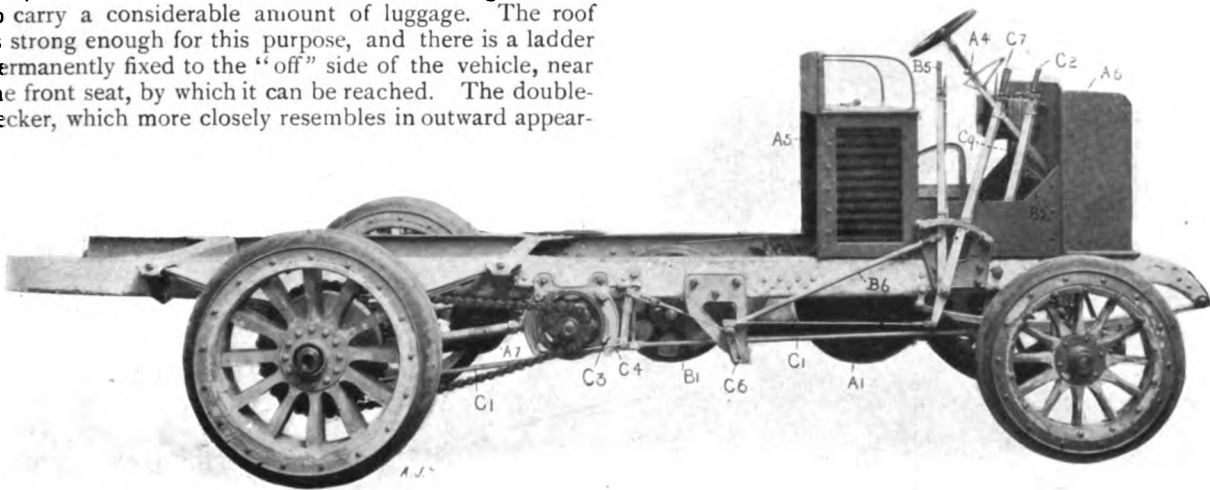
Side View of the Wolseley Omnibus Chassis, fitted with the twin-cylinder 20-h.p. Petrol Engine.
